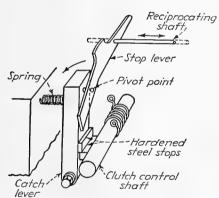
In this textile machine, any movement that will rotate the stop lever counterclockwise will bring it in the path of the continuously reciprocating shaft. This will cause the catch lever to be pushed counterclockwise and the hardened steel stop on the clutch control shaft will be freed. A spiral spring then impels the clutch-control shaft to rotate clockwise, which movement throws out the clutch and applies the brake. Initial movement of the stop lever may be caused by the breaking of a thread, a moving dog, or any other means.
